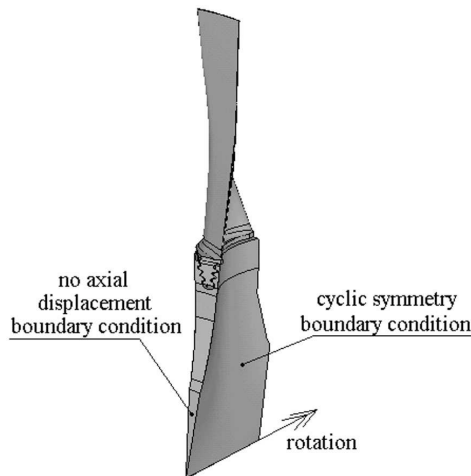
Assembly of LP turbine blade and disc section; boundary conditions
